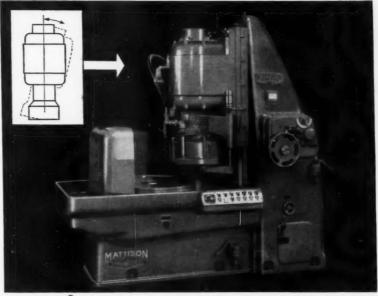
Quick-Tilt® spindles solidify all the accuracy and stock removal features built into Mattison No. 24 and 36 rotaries. These machines are being built with spindle motors up to 60 hp to provide optimum cutting speeds on stock-removal operations.
